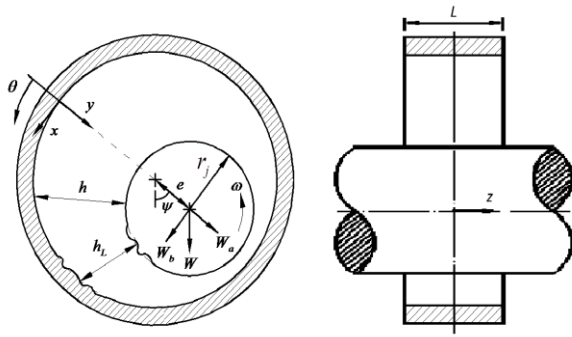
Geometry of a magnetic fluid lubricated rough journal bearing.
